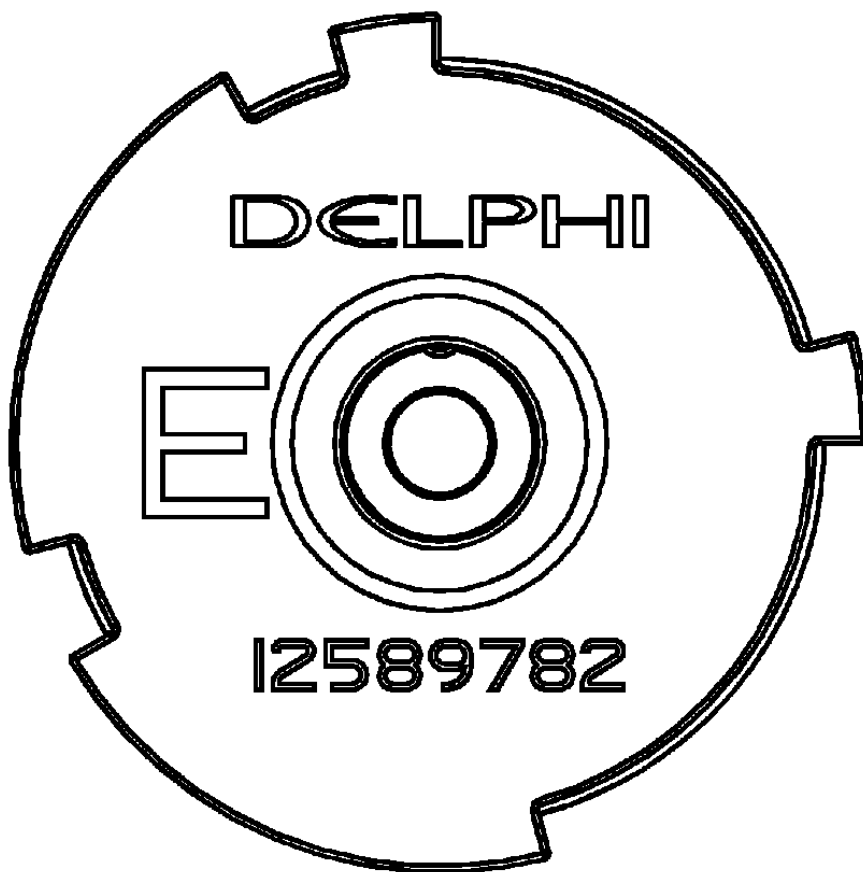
Identifying Engine Oil Pressure Sensor And/Or Switch (LFX)
